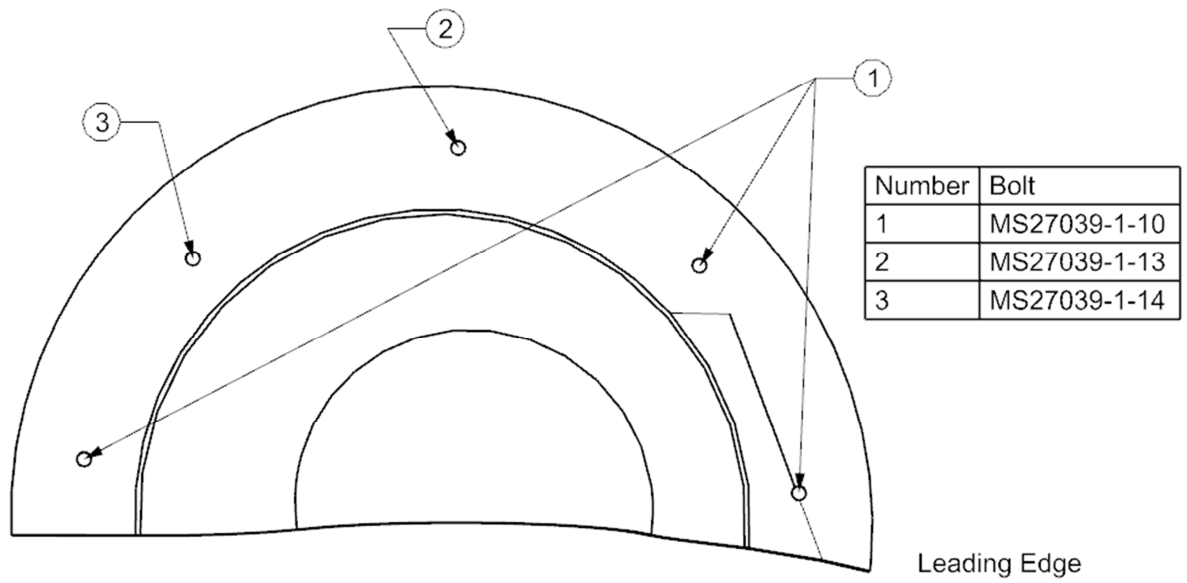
Outboard Wing Pylon Forward Lug Cover Fastener Placement
